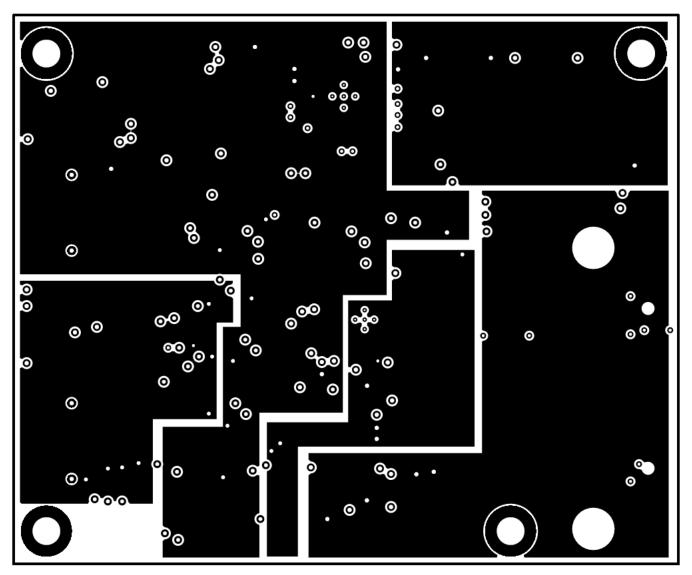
ADS9120EVM PCB Layer 3: Power Planes
